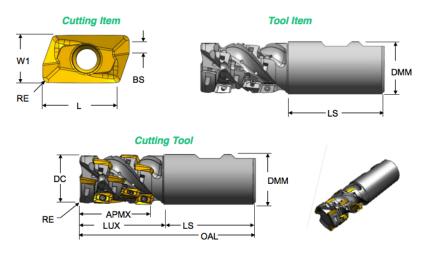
Cutting Tool, Tool Item, and Cutting Item
